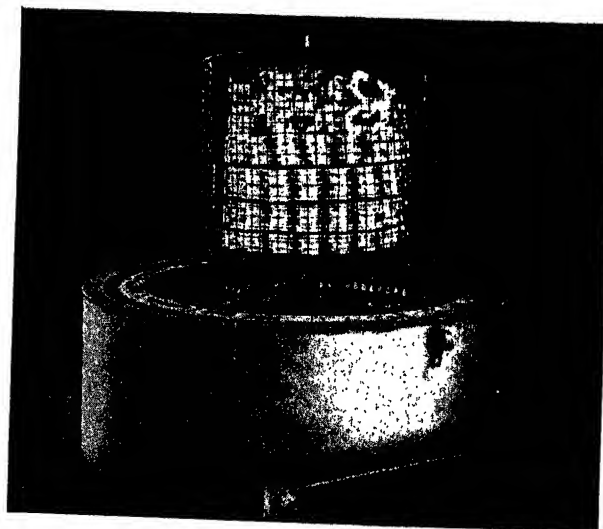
84-Kw. PIT TYPE ELECTRIC FURNACE FOR HEAT TREATING ALUMINUM ALLOY CASTINGS
